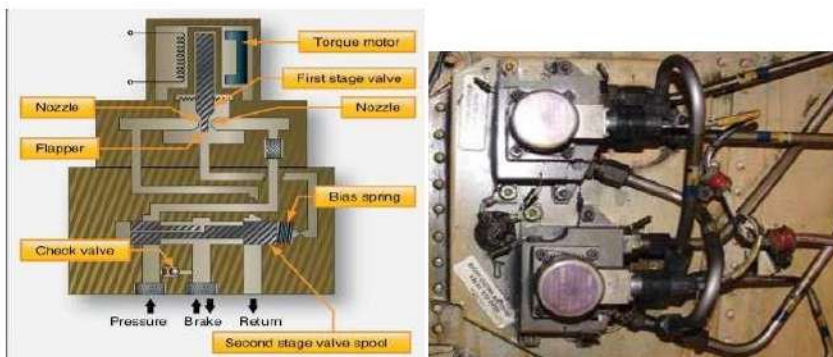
An antiskid control valve uses a torque motor controlled flapper in the first stage of the valve to adjust pressure on a spool in the second stage of the valve to build or relieve pressure to the brake. Figure-83 Two antiskid control valves with associated plumbing and wiring.
